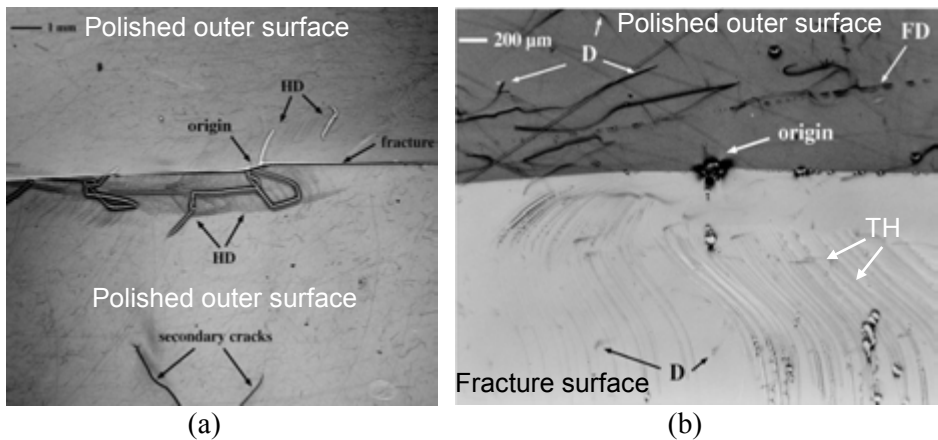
X-ray topographs of a fractured sapphire hemispherical dome. (a) shows the outer polished surfaces of the matching fracture halves. The broken halves were carefully realigned for this image. It reveals handling damage (HD) cracks not readily visible to the optical or scanning electron microscopes. (b) shows a close up of one piece tilted to show both the fracture surface and outer polished surface. Twist hackle – cleavage step lines (TH), dislocations (D), and fabrication damage (FD) are apparent. (Courtesy D. Black).
